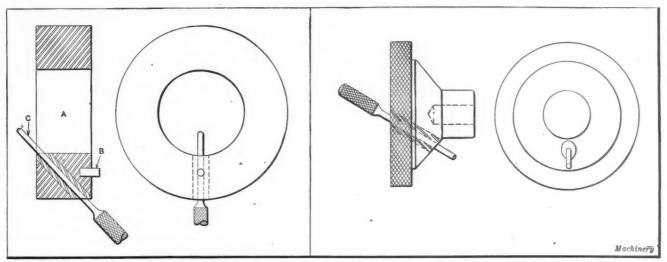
Gage for locating Angular Hole drilled in Stem of Fuse Body
